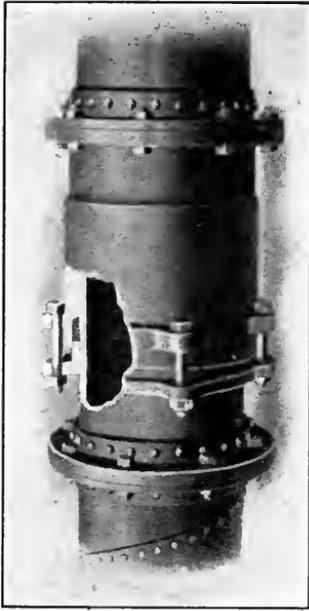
FIG. B.—Types of joints for steel pipes. (American Spiral Pipe Works.)
